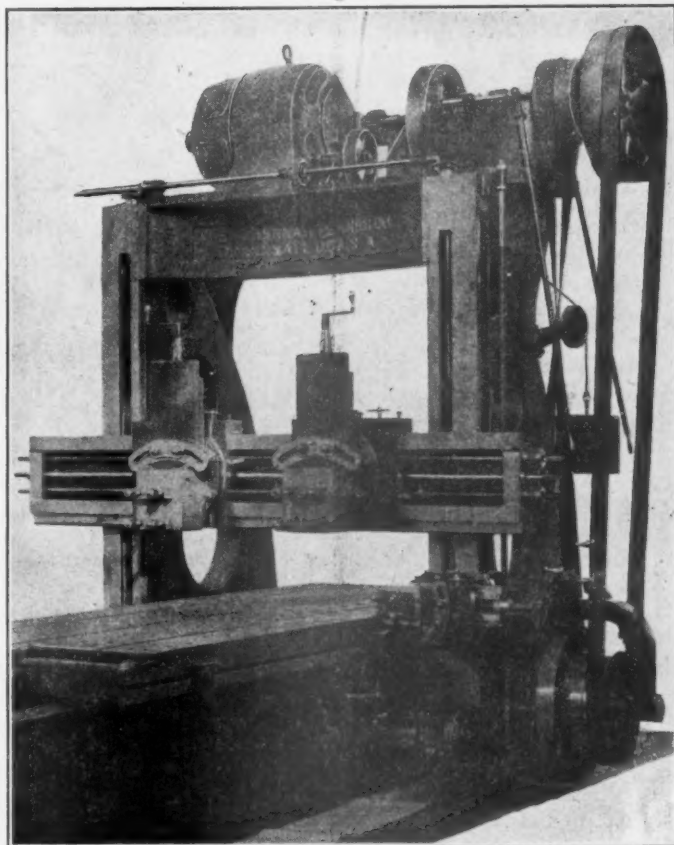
GEARED DRIVE UPON A PLANER BUILT BY THE CINCINNATI PLANER COMPANY, USING GEAR BOX FURNISHING VARIABLE CUTTING SPEEDS AND CONSTANT RETURN. JANTZ & LEIST CONSTANT-SPEED MOTOR.
